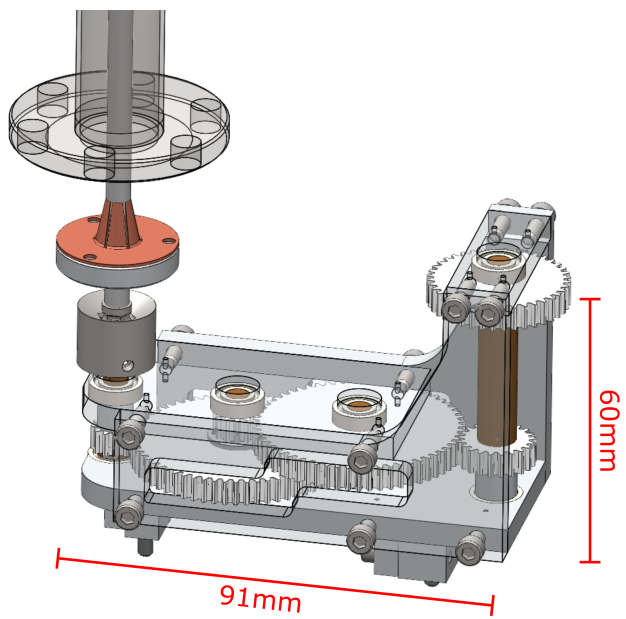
Model of the gearbox with a transparent side wall. The gear at the right is connected to the gear seen in Figure 8 c), when the valve is inside the setup.
